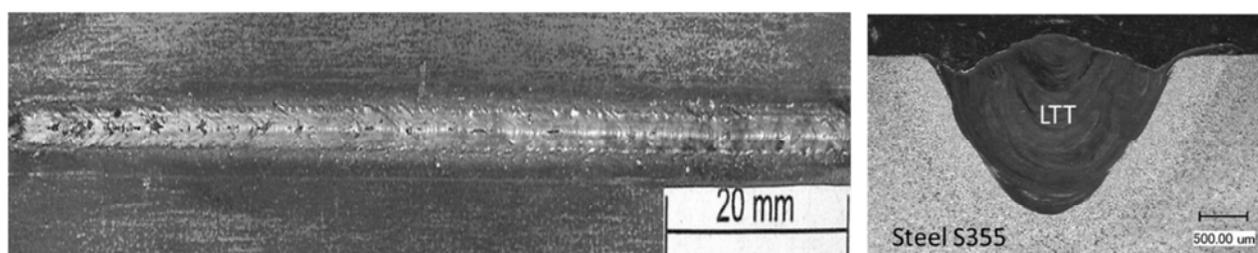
Weld appearance- Seam top (left); Cross-section (right)
